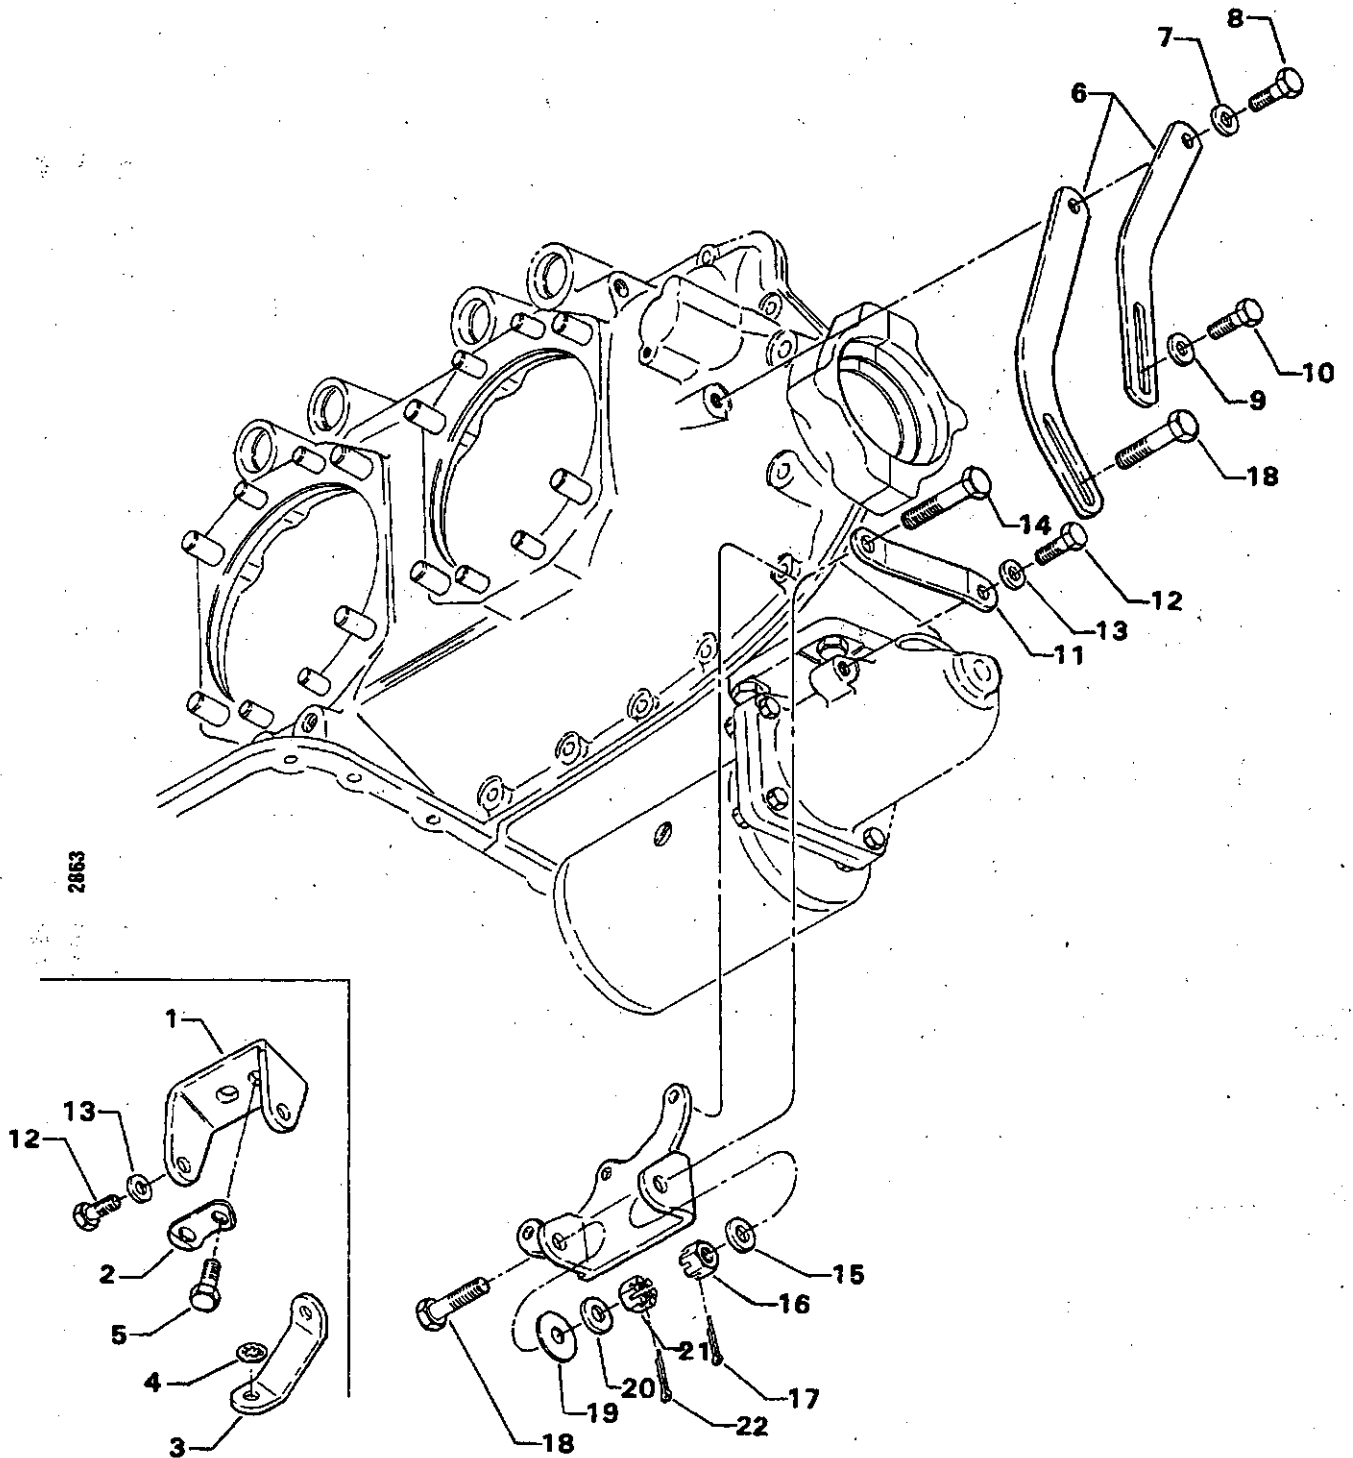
GENERATOR MOUNTING AND ATTACHING PARTS
